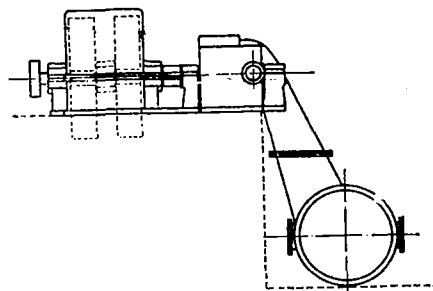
Steam turbine of 25,000 horsepower for tunnel shown on figure 22. High-speed turbine with gear drive and Velox boiler.
